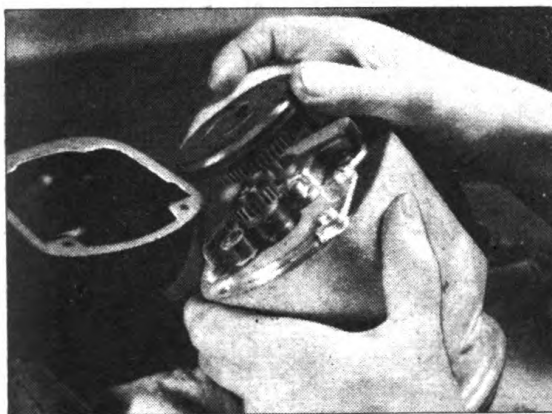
Method of Removing or Properly Meshing Distributor Gear with Steel Gear
